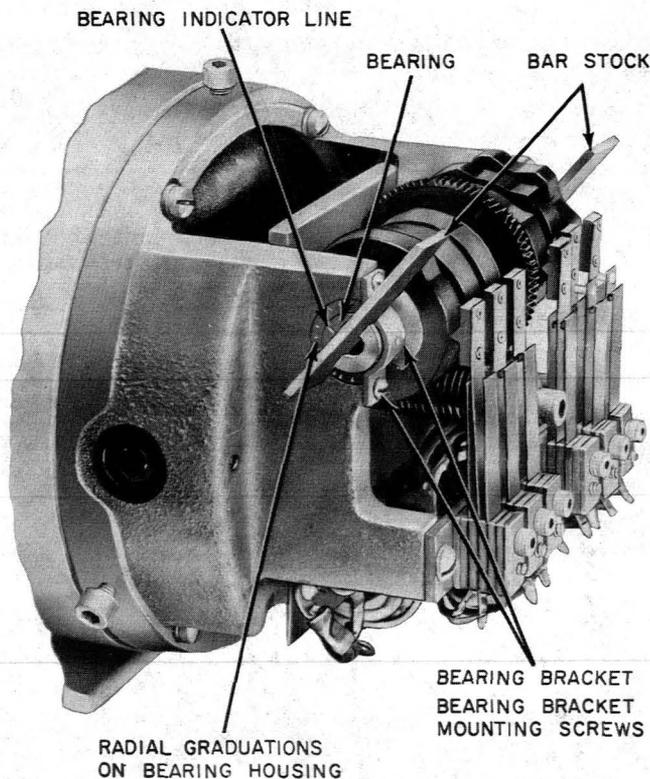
KS-15804 L2 Electronic Specialty Co—Method of Adjusting Clearance Between Worm and Worm Gear
